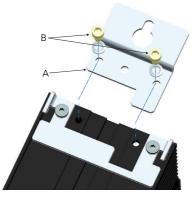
Bulkhead mounting 80A/100A unit shown (125A similar)
